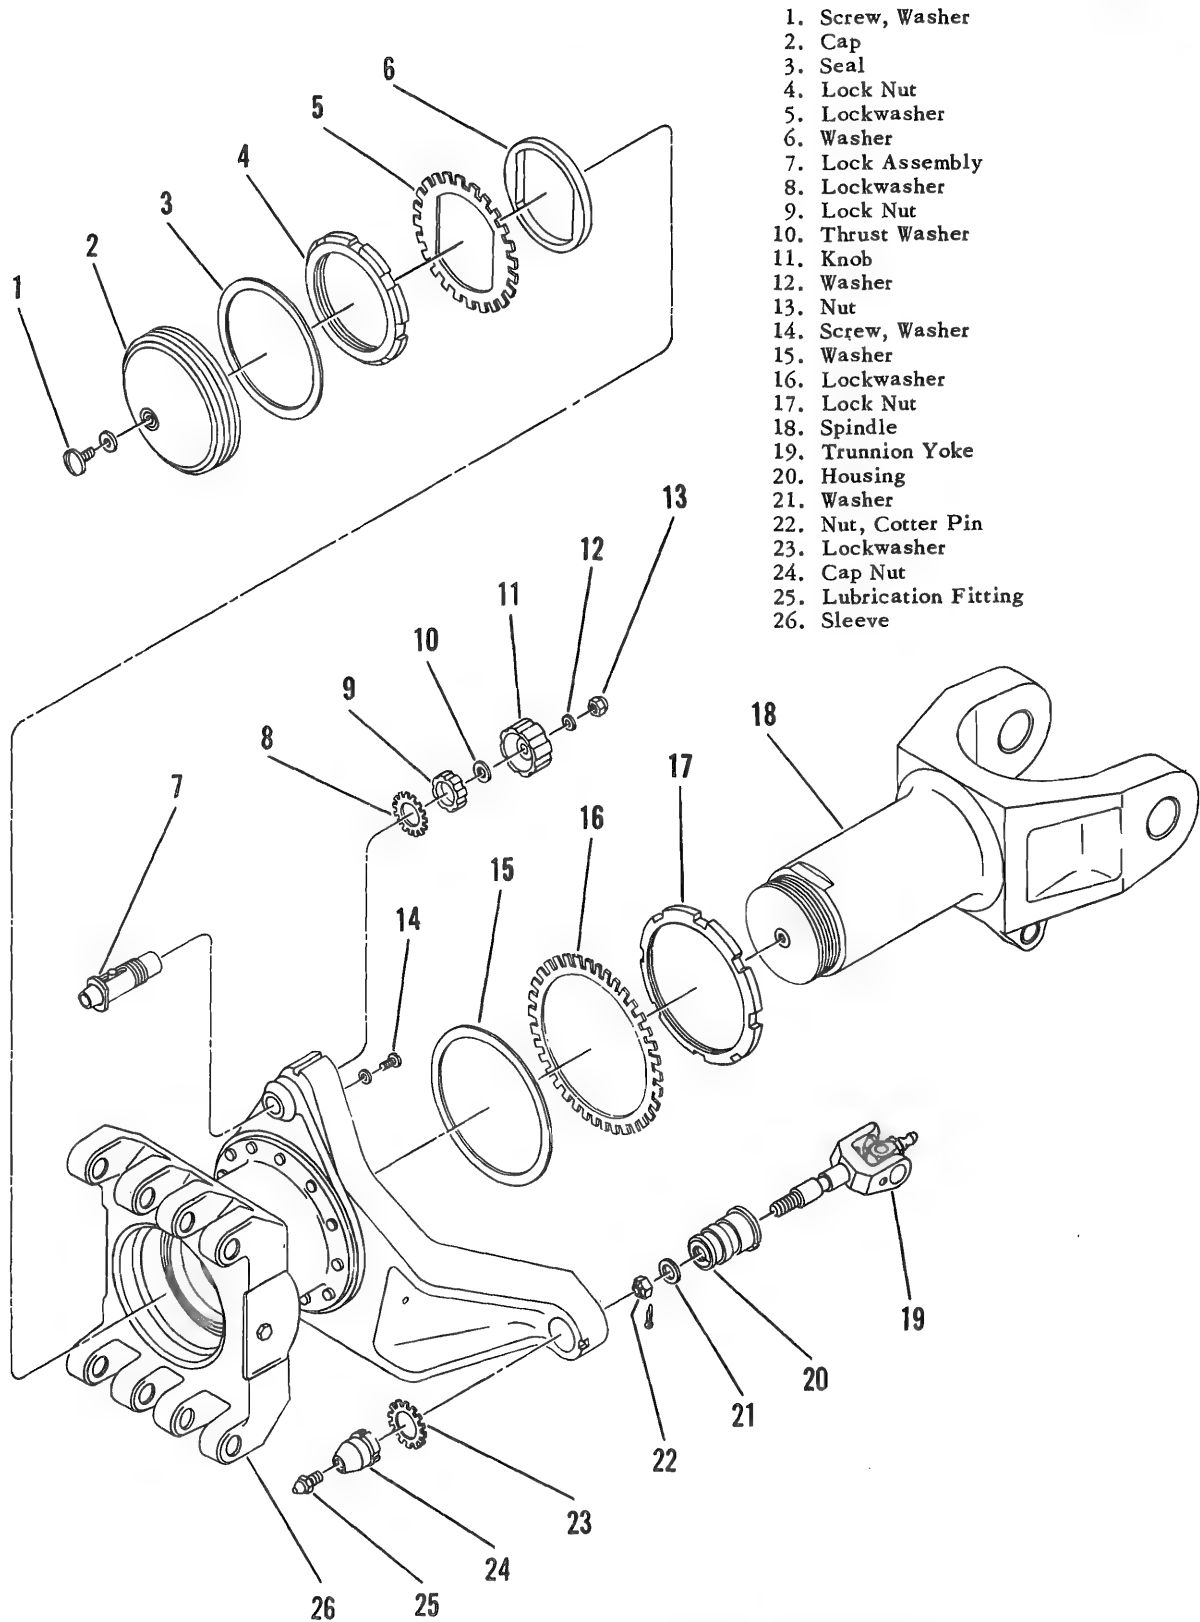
Sleeve-Spindle Assembly - Disassembled
